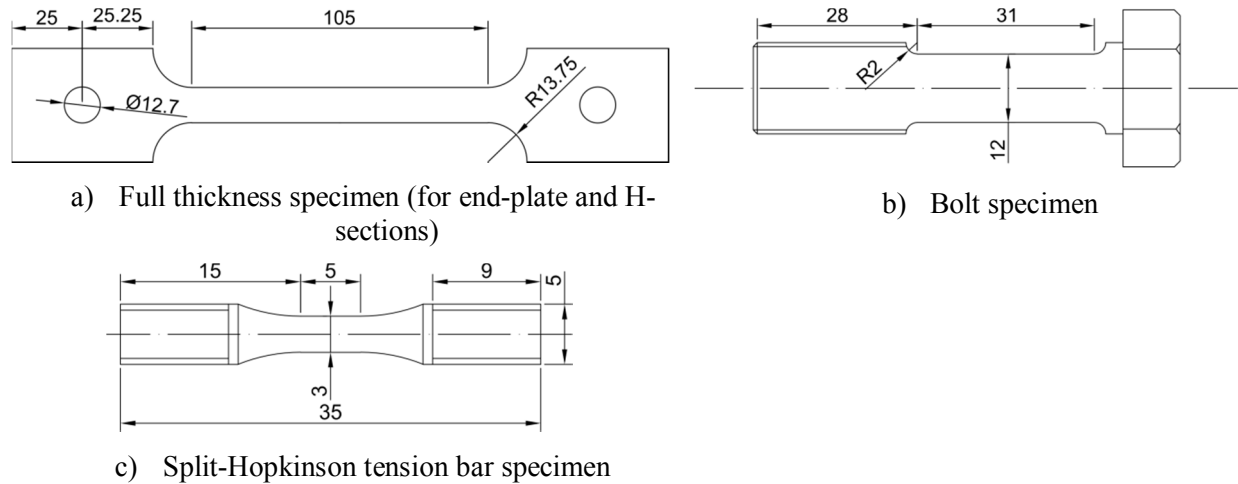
Test specimens employed in uniaxial tension tests (measures in mm).
